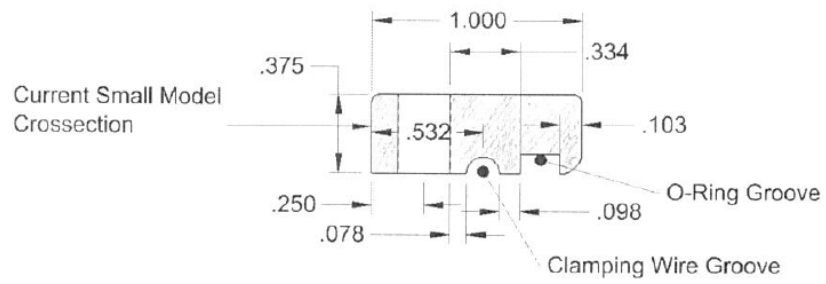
Cross-section view of the bolt/wire/O-ring configuration for Frames 3 and 4. Dimensions are in units of inches.
